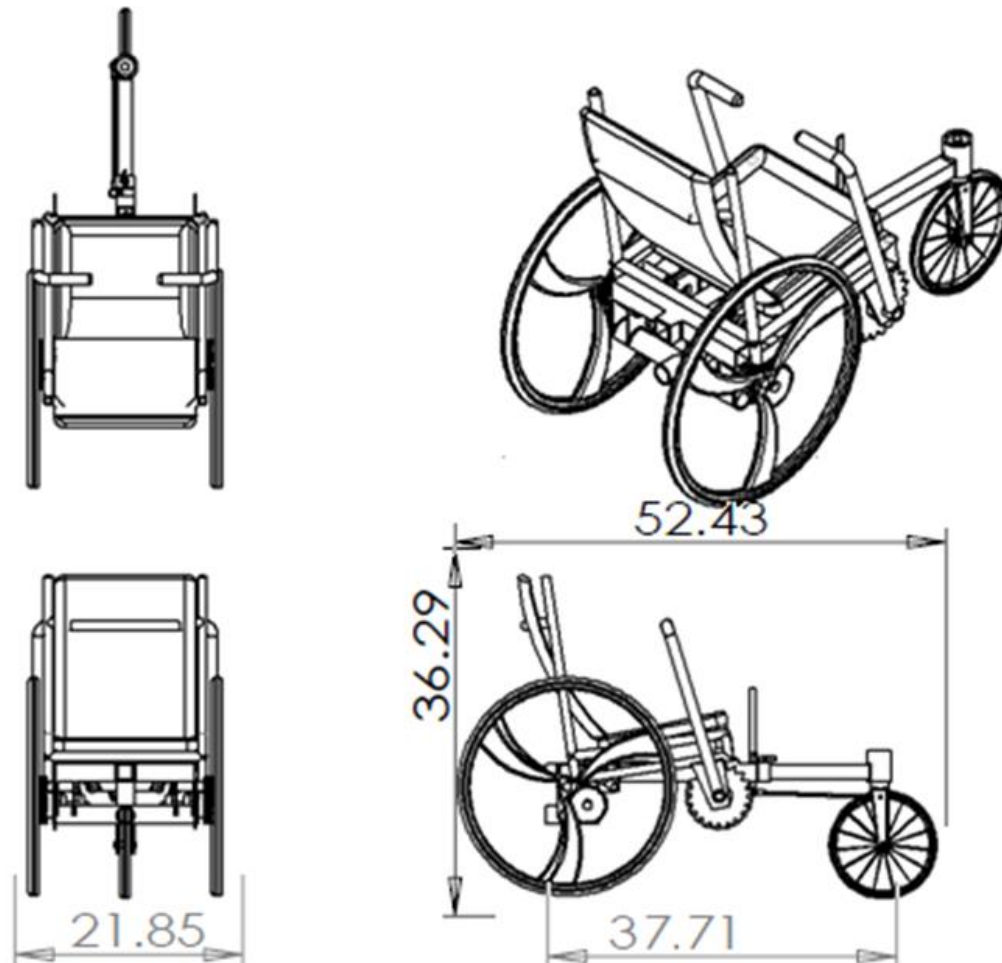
CAD Drawing of the Assembly of Fast Speed Driving Wheelchair.
